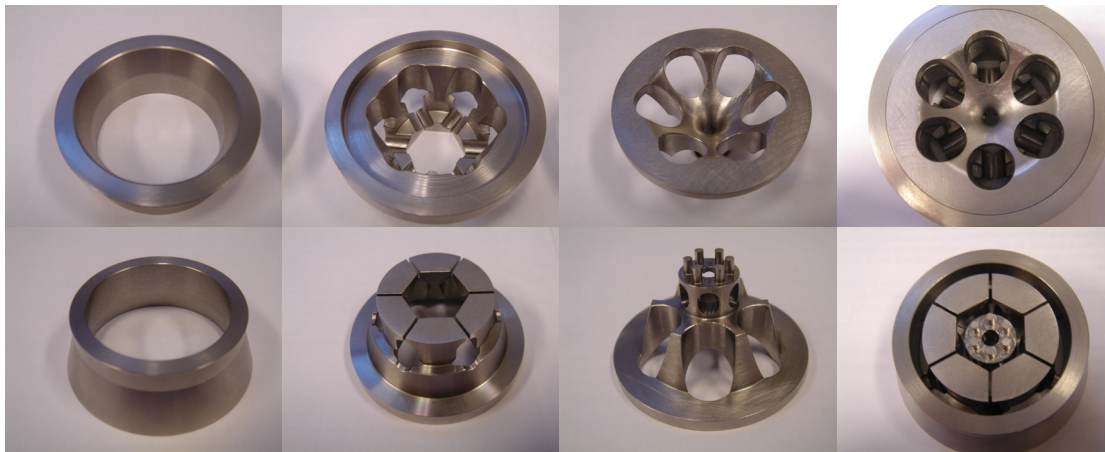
The fabricated stainless steel die parts separated and assembled (Version 1).
